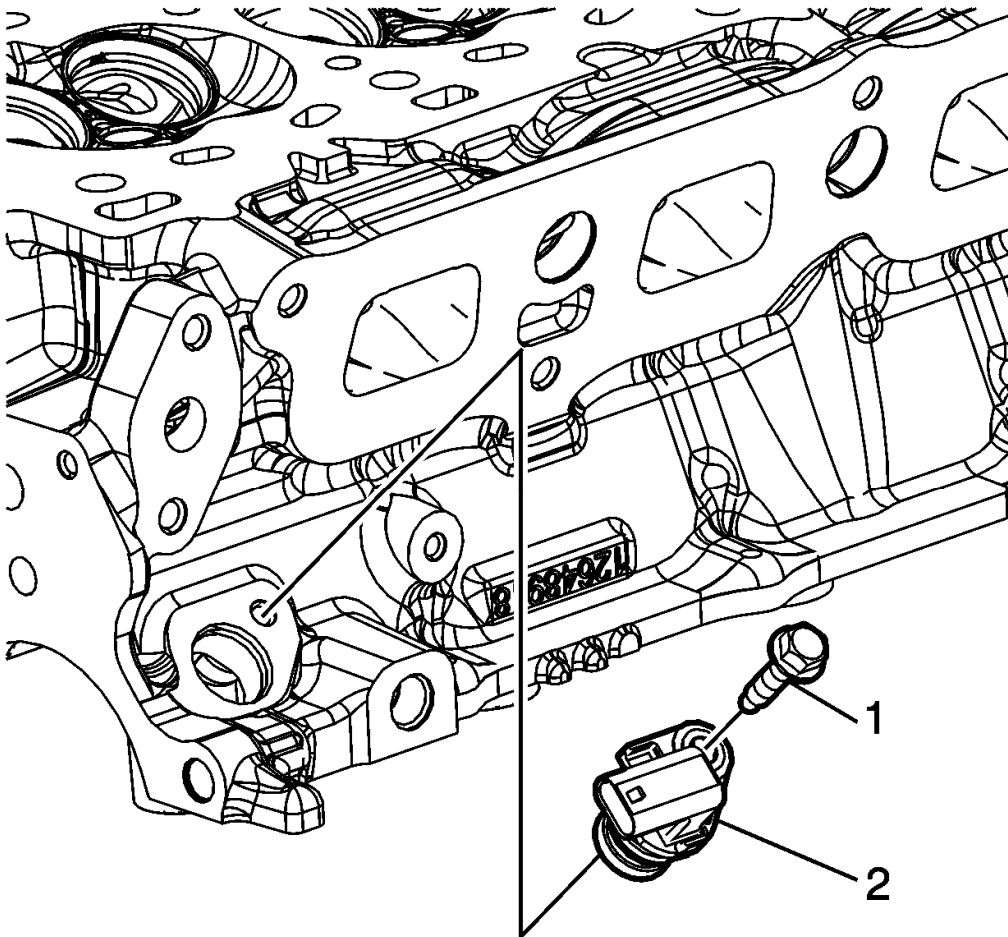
Exhaust Camshaft Position Sensor And Bolt
